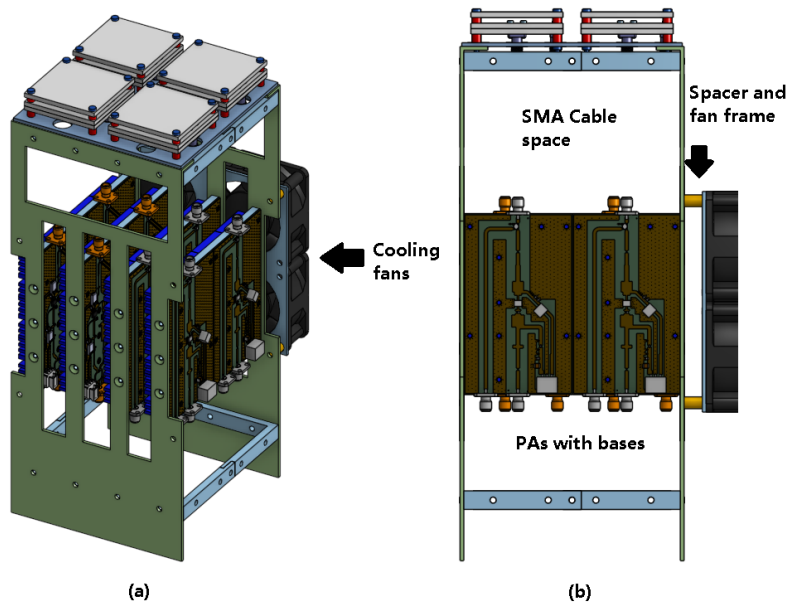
Fully assembled model: (a) Trimetric view, (b) Right view.
